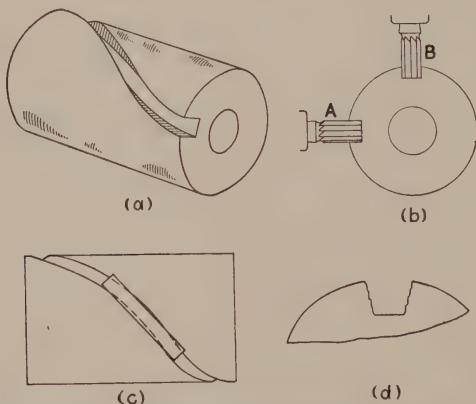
In (*a*) is shown a rectangular spiral groove, and (*b*) illustrates how this cut may be made with an end mill held horizontally as at *A* or in a vertical spindle as at *B*. If it were attempted to mill such a groove with a narrow plain milling cutter or a slotting cutter as in *C* the groove when cut would not be rectangular but would appear about as shown somewhat enlarged at (*d*).
